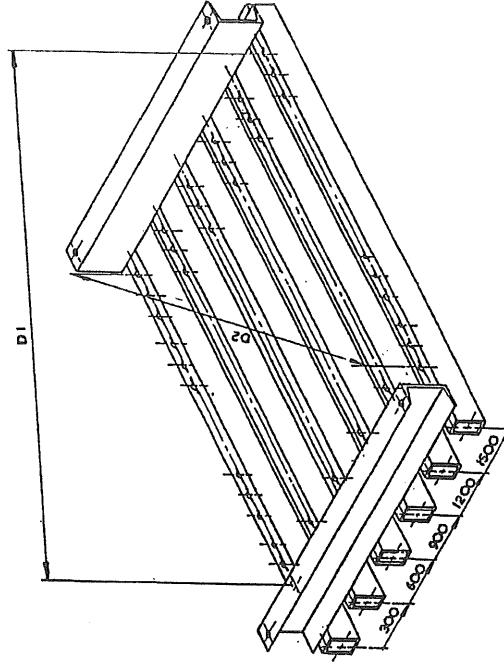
DIMENSIONAL CHECK ON FRAME OF EMITTING SYSTEM - BOTTOM (750MM WIDE CE PLATE)
